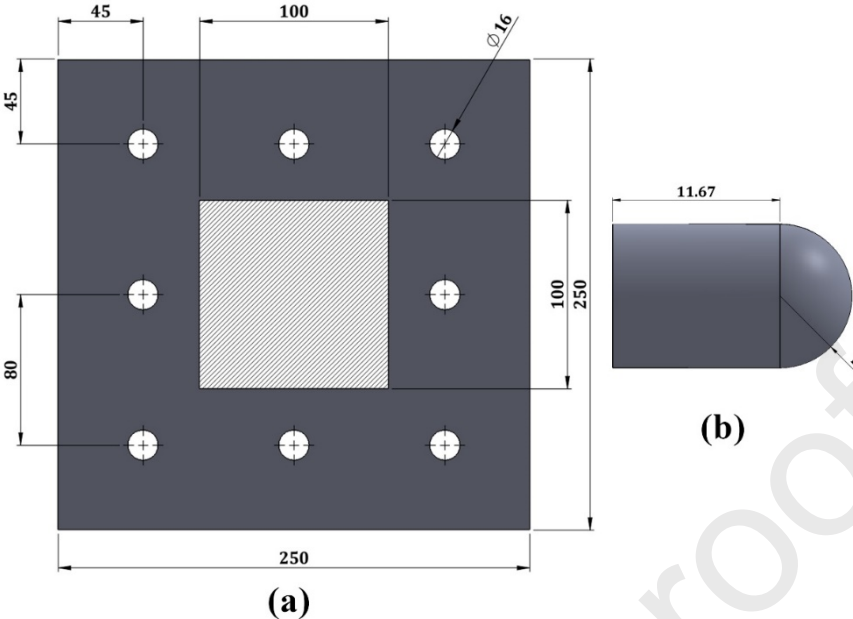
(a) Schematic of fixture used for ballistic tests, (b) Technical drawing of projectile (dimensions in millimeter)
